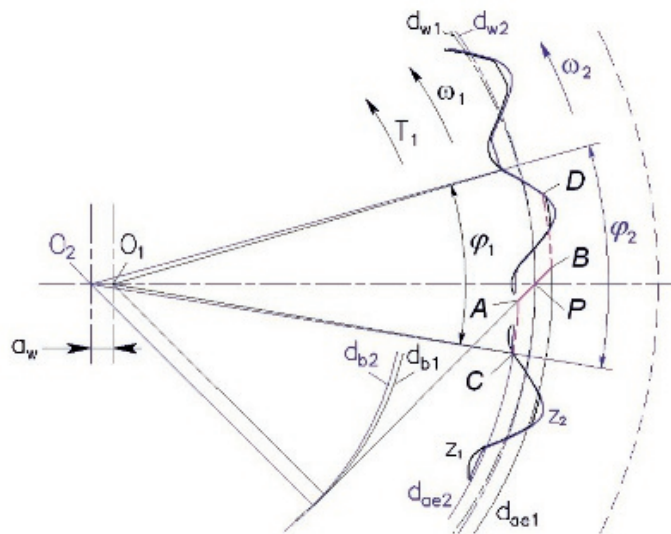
Effective contact ratio definition; ϕ_1 and ϕ_2 – engagement angles of the planet and ring gears, ω_1 and ω_2 – planet and ring gear rotation directions, T_1 – pinion torque, C – initial point of the tooth contact, A – initial point of the involute flank contact, B – final point of the involute flank contact, D – final point of the tooth contact, P – pitch point.
